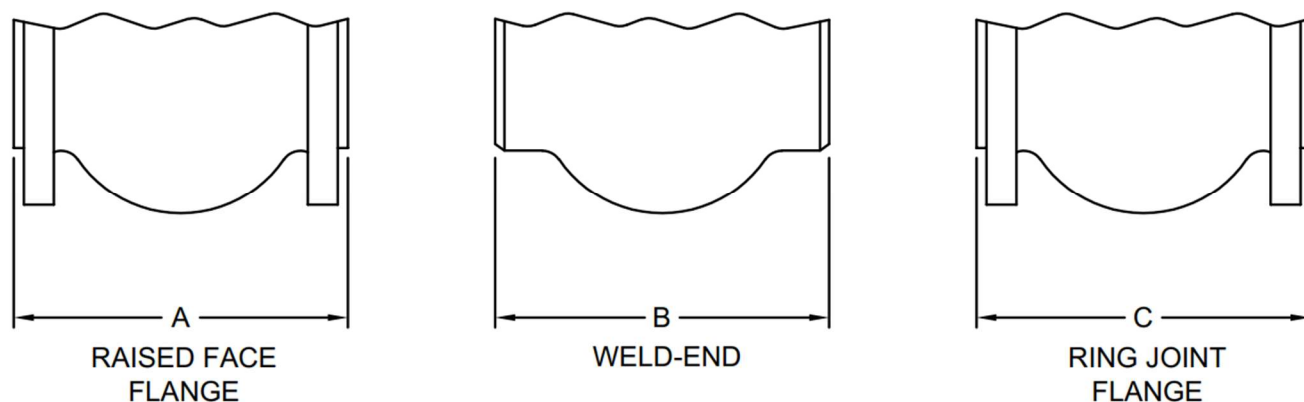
Face-to-Face and End-to-End Reference Dimensions, A, B, and C
